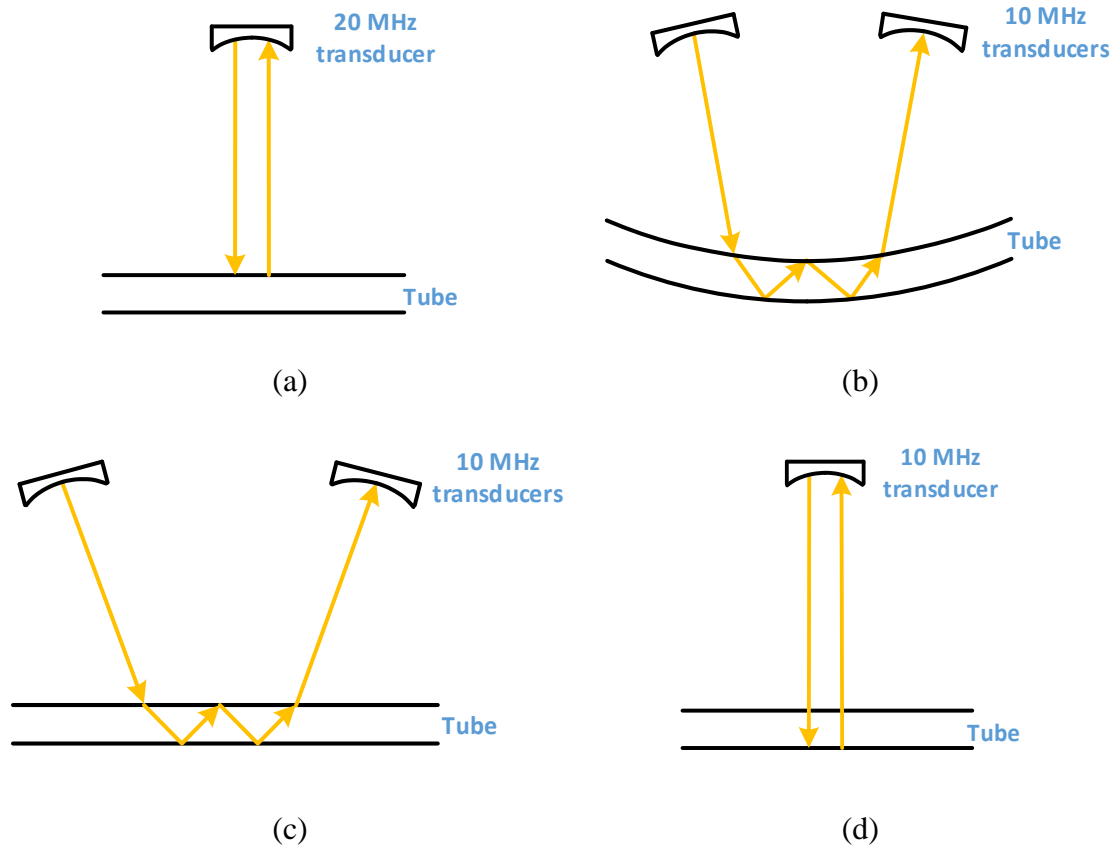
Schematics of ultrasonic inspection of CANDU pressure tubes using CIGAR Sensor Head (a) ID inspection; (b) circumferential material inspection; (c) axial material inspection; (d) OD inspection
